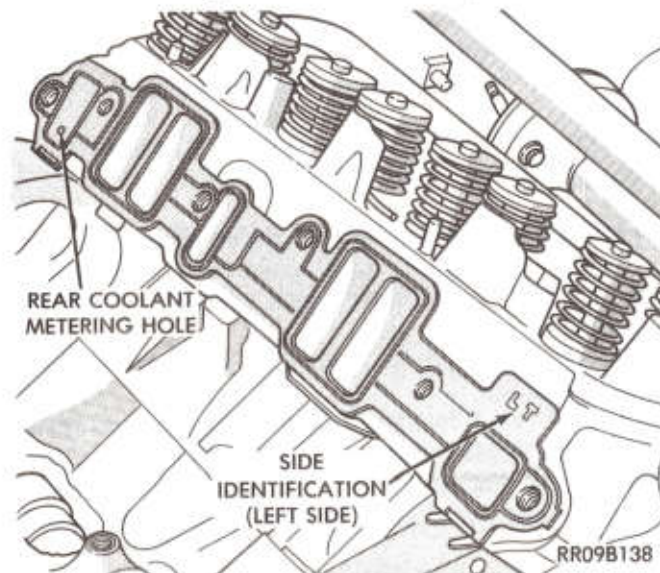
318 Intake Manifold Side Gaskets (Left Side Shown)
